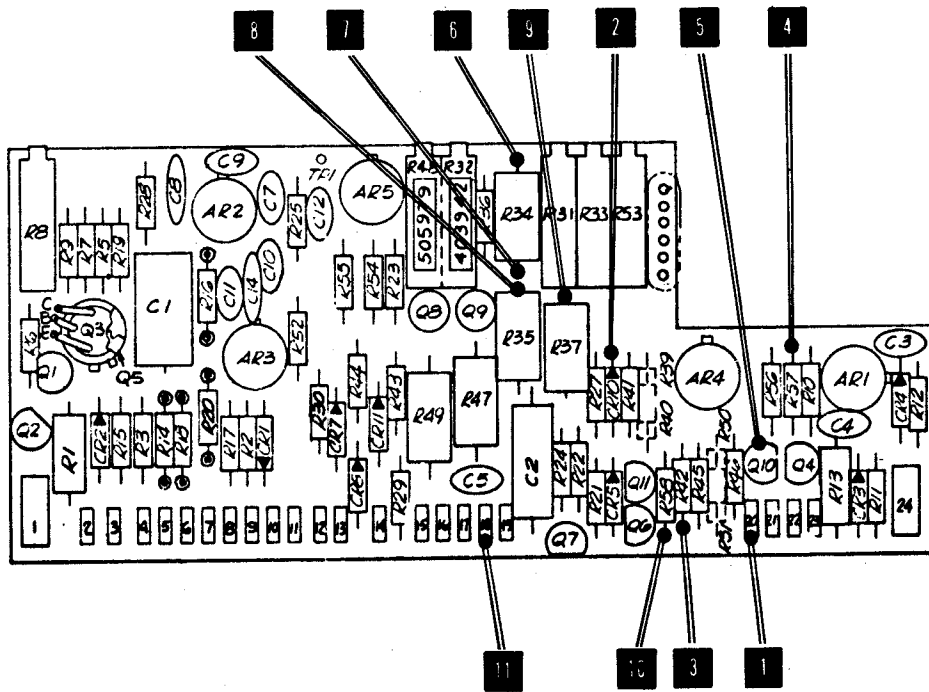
Display PCB, Subassembly Test Point Locations
